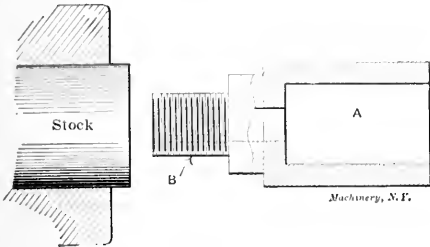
Type of Work requiring the use of Thread Rolling Attachment.
